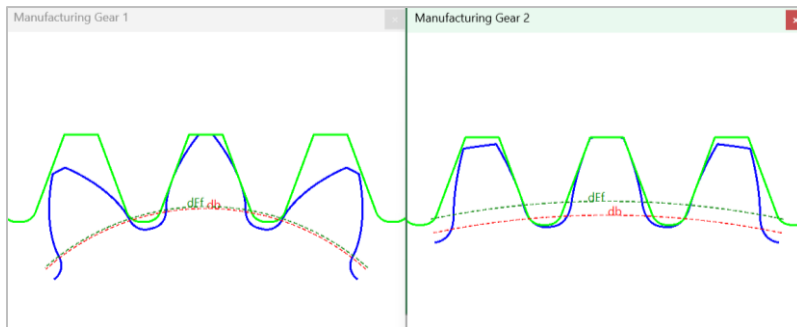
Gear (blue) in engagement with the rack-shaped tool (green). Left: Gear 1. Right: Gear 2.
